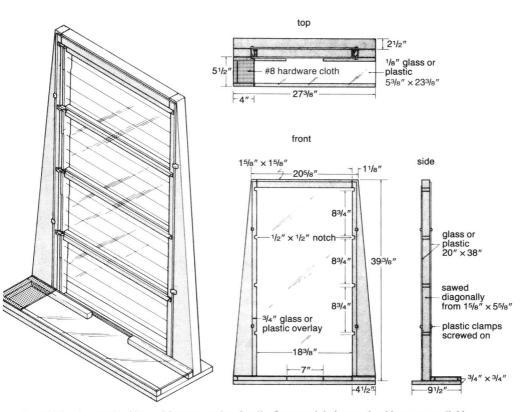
An observation hive, with construction details. Commercial observation hives are available, also.
